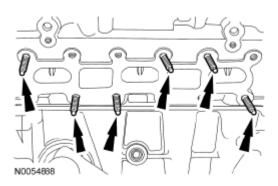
Locating LH Exhaust Manifold Nuts Courtesy of FORD MOTOR CO.
